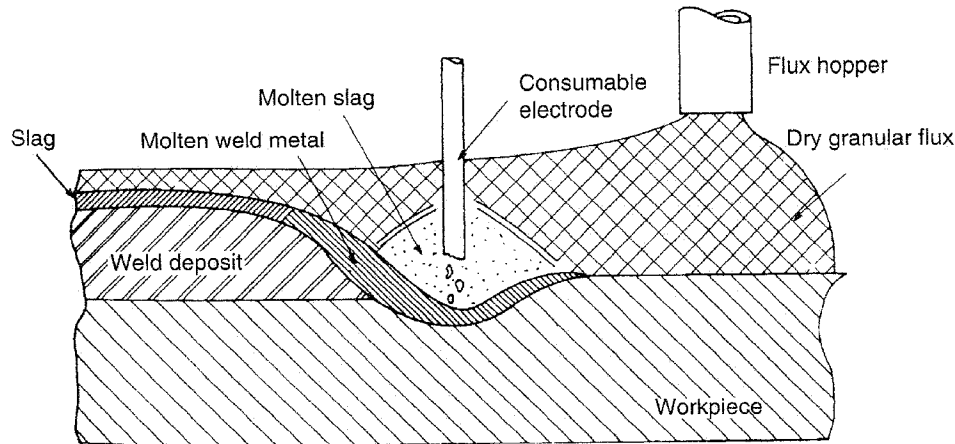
Schematic illustration of the submerged arc welding process used for heavy deposition in plane (i.e., down-hand) only. Source: Ref 2
